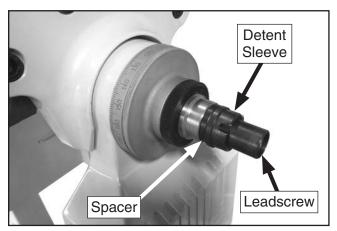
X-axis leadscrew with retaining nut, power feed ball handle, and compression spring removed.
